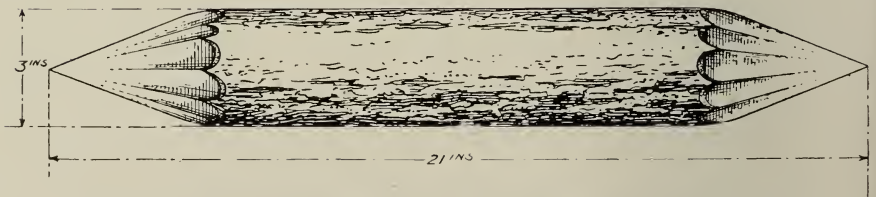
Drawing showing standard dimensions of a mine sprag.
